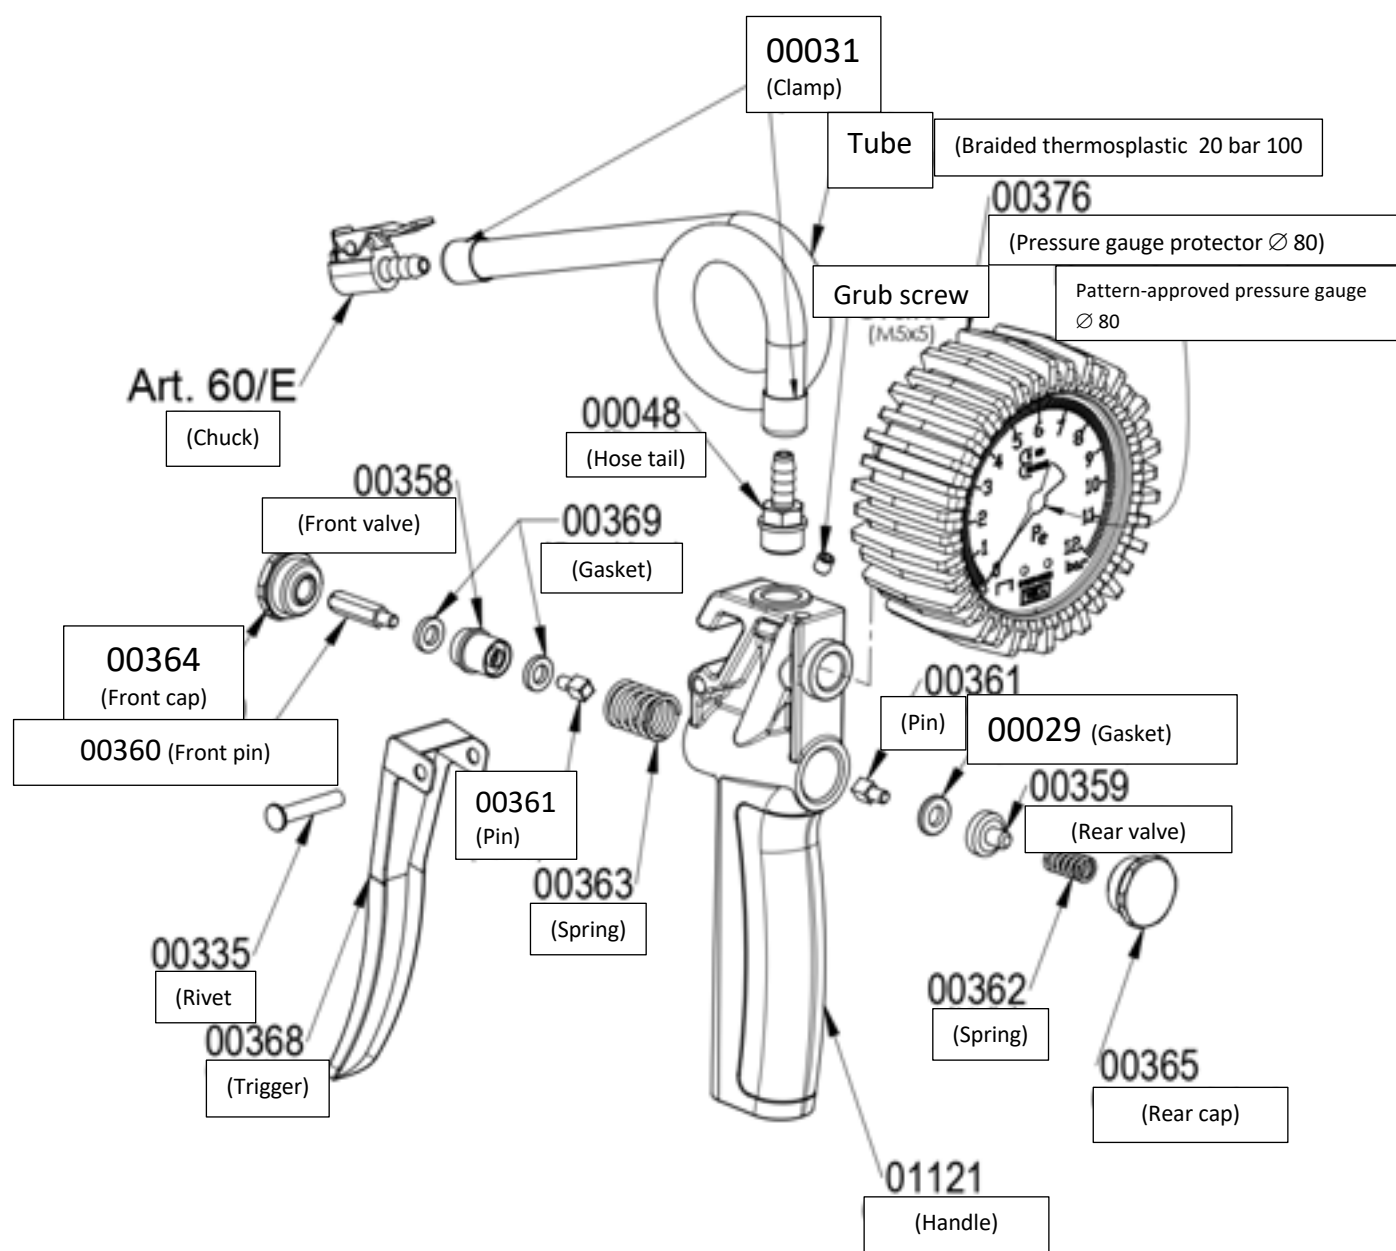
EXPLODED VIEW OF TYRE PRESSURE GAUGE “60 G/T” (vers. 80 mm)
